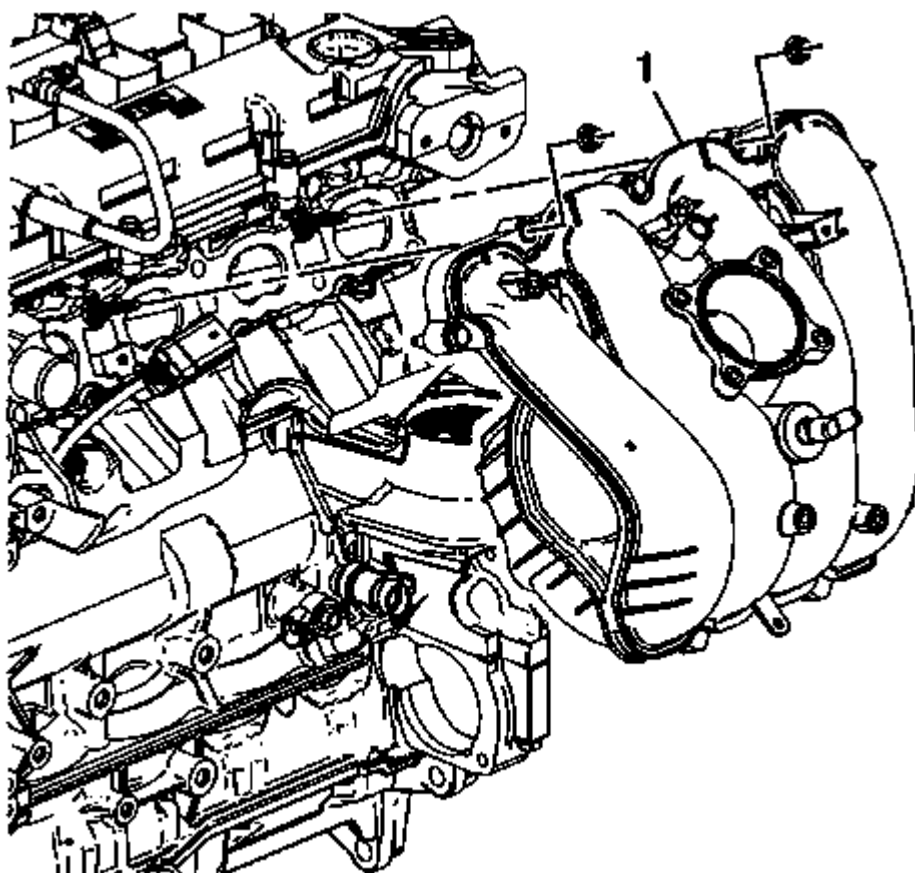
Intake Manifold Retaining Nuts And Bolts
